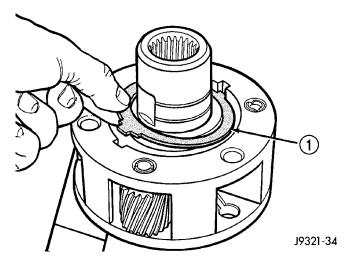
Front Tabbed Thrust Washer Removal 1 - FRONT TABBED THRUST WASHER
